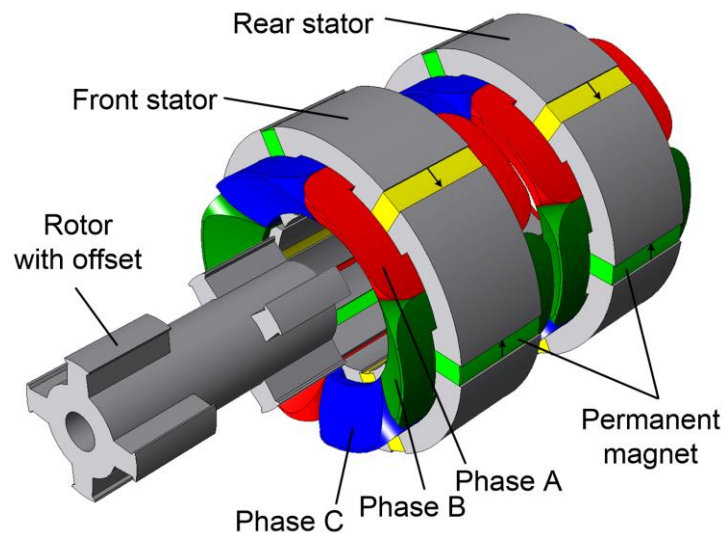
Exploded view of proposed Topology-II of the dual-stator 6/4 FSPM machine.
